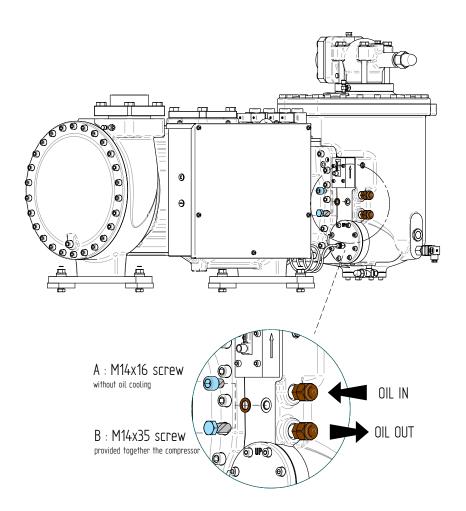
oil inlet/outlet connection location for the external oil cooling circuit;
